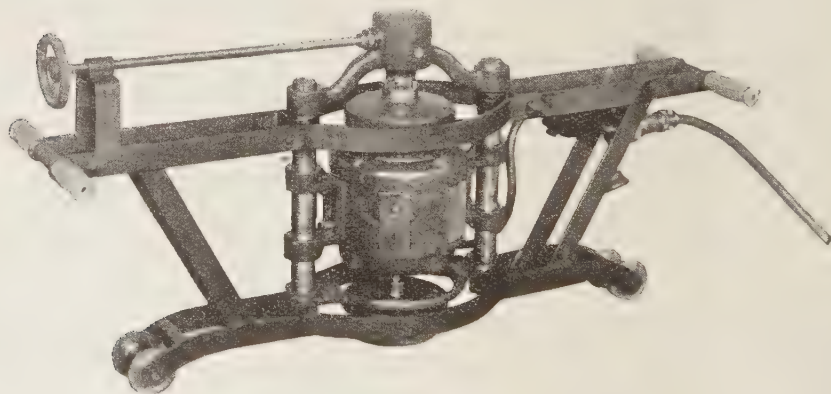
is. — Adjustable grinder on mobile frame for grinding built-up surfaces (*French Nord Railway*).
